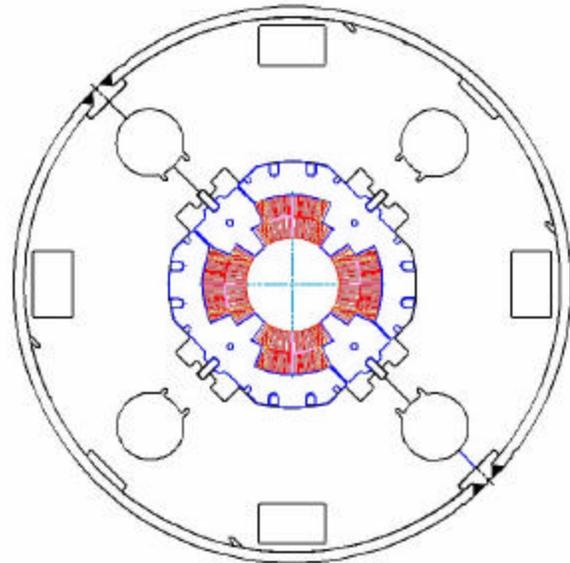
Prototype magnet cross-section. The coil bore diameter is 70 mm and the skin outside diameter is 416 mm.
